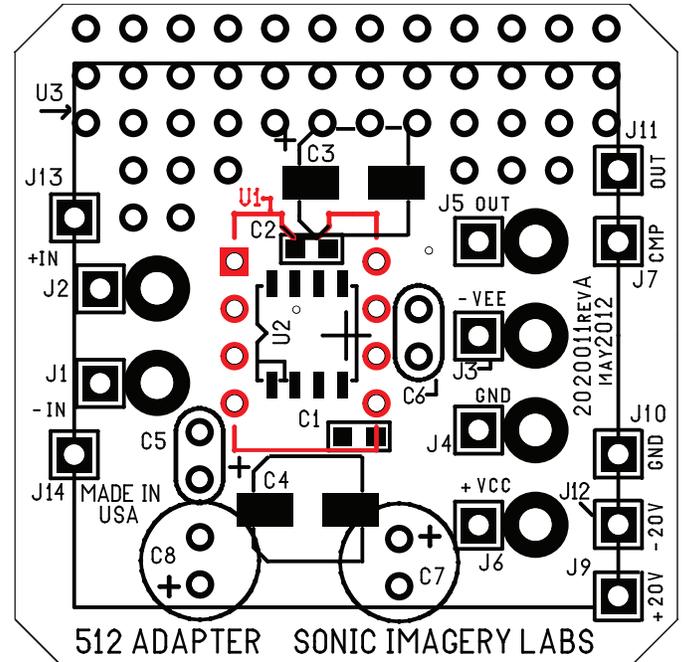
Comp/Top Side of PCB showing DIP8 - U1 location in red.
